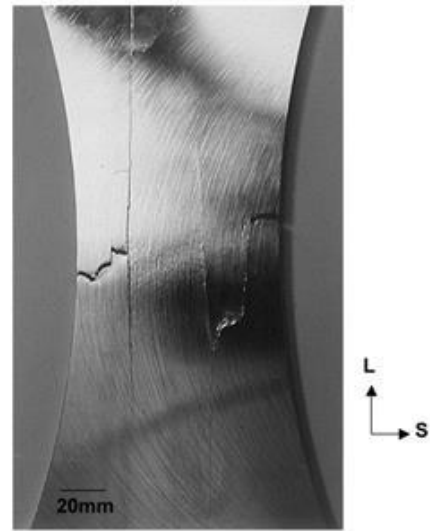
Macroscopic crack deflection in thick AA7050 plate for L-S orientation smooth specimen fatigue tests.
